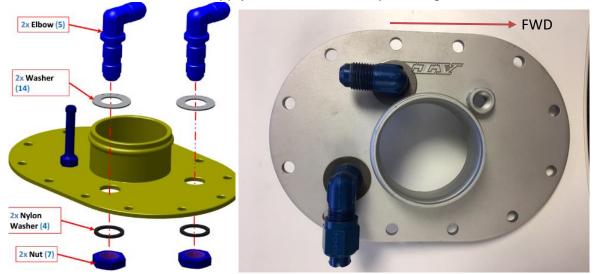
Assembly diagram of the bulkhead fittings and hardware in the filler neck access port.
